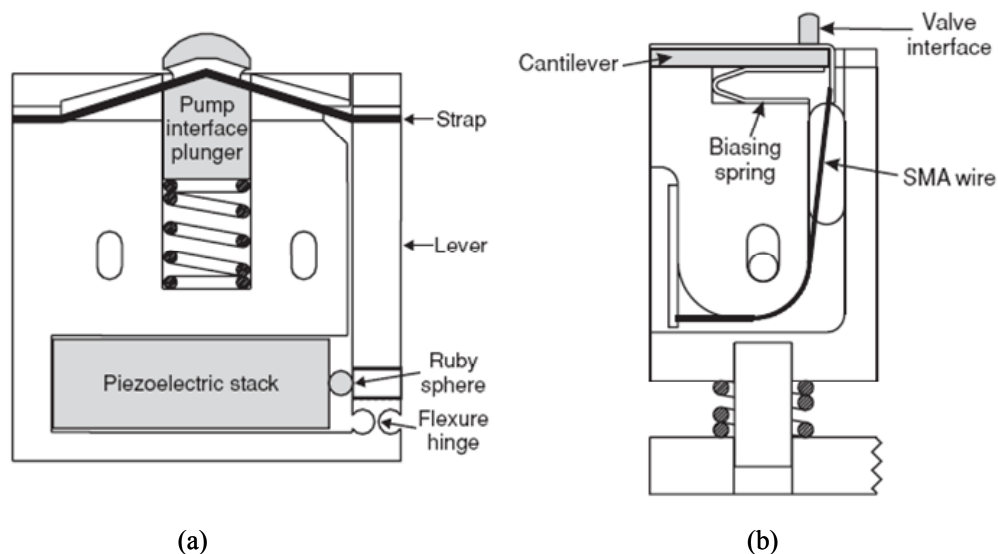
Schematic cross-sectional drawing of the principal components in (a) pump actuator, (b) valve actuator[6].
